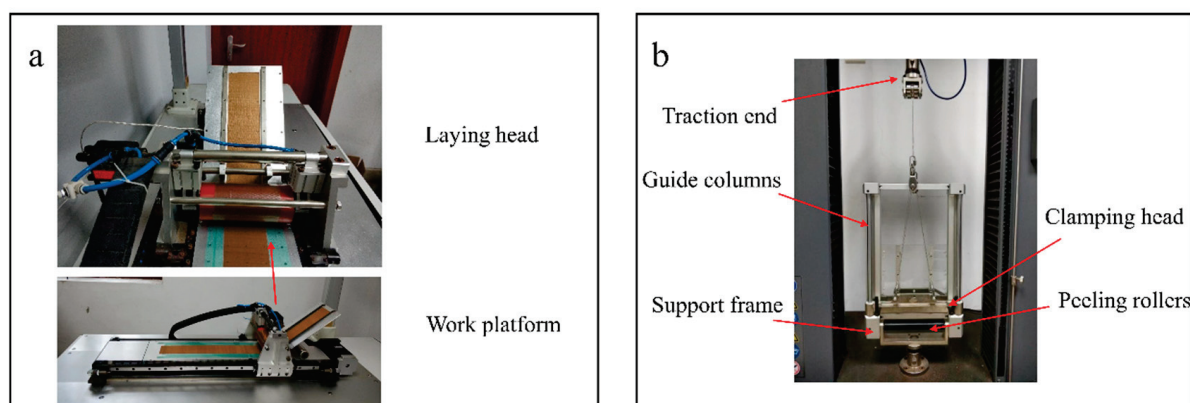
Test device. (a) Automatic tape-laying platform; (b) peeling test fixture.
